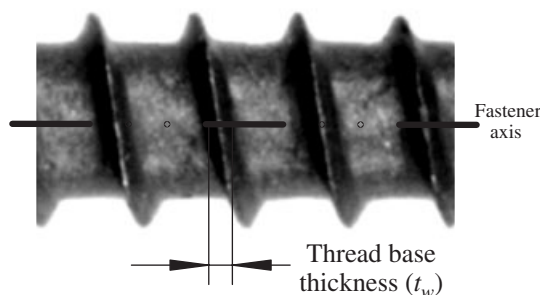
The user draws line along fastener axis to measure thread base thickness
